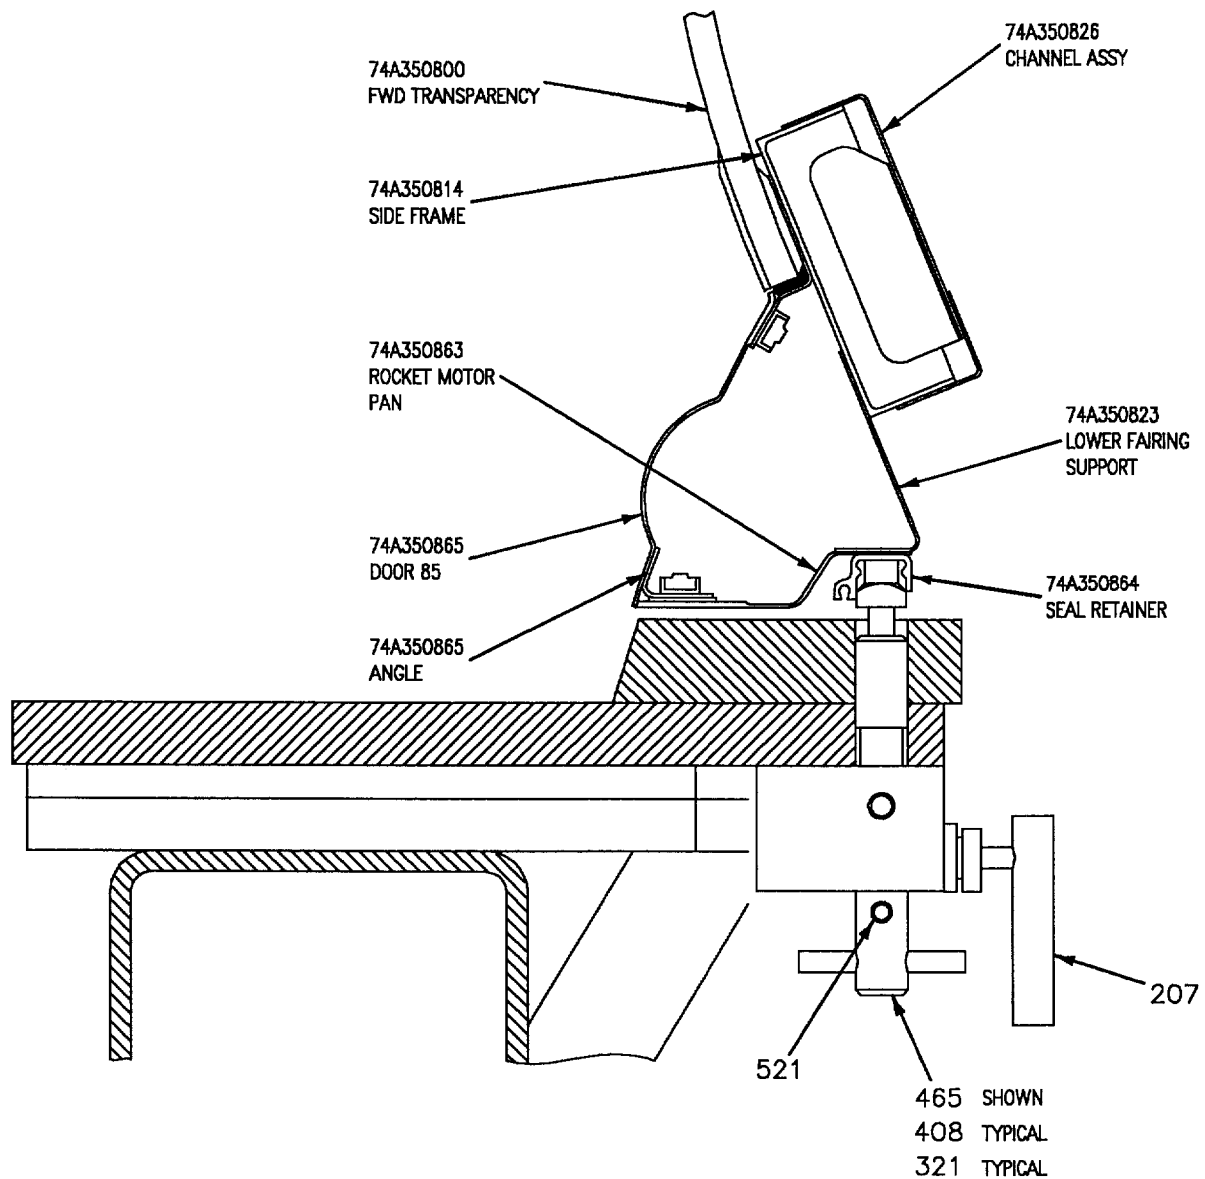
Replacement - Rocket Motor Pan (Sheet 4)
